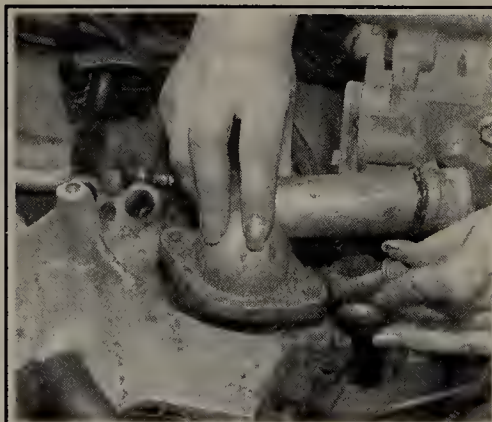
If necessary, unfasten the mounting bolts and remove the coolant outlet
